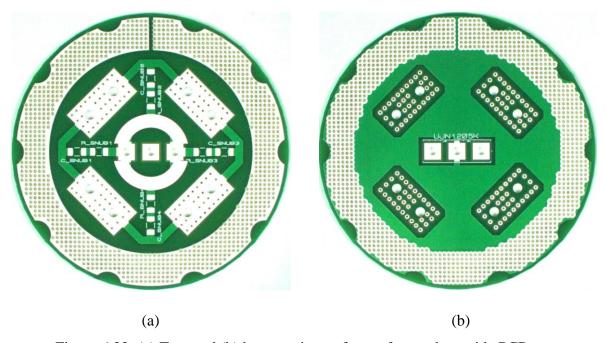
(a) Top, and (b) bottom views of manufactured top-side PCB
